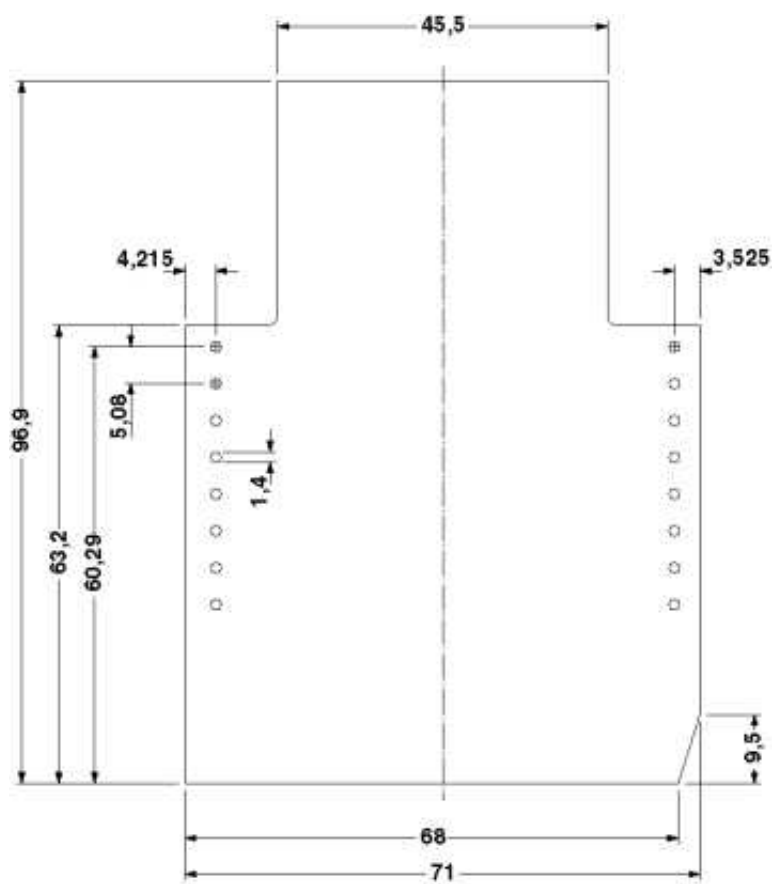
Dimensioned drawing 2 - Component mounting side, if the double-level upper part is used.
